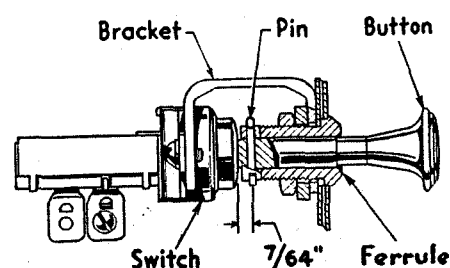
In case of automatic engagement of the starter switch the points indicated should be investigated in the switch assembly
